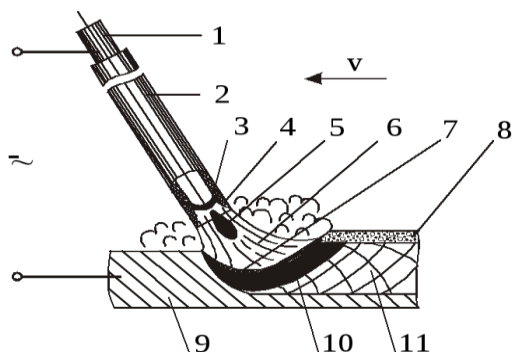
The process of making a welding seam by manual electric arc welding; 1 – metal rod, 2 – electrode coating, 3 – liquid metal residue, 4 – visor, 5 – liquid metal drop, 6 – arc plasma, 7 – liquid slag film, 8 – slag crust, 9 – material to be welded, 10 – liquid metal bath, 11 – weld
